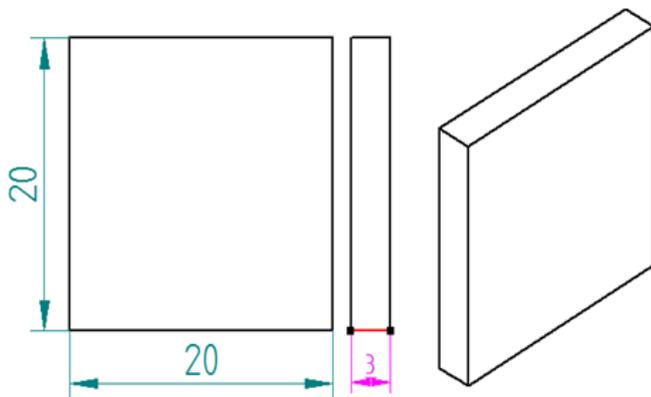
Geometry and Dimension of composite specimen for Hardness Test
